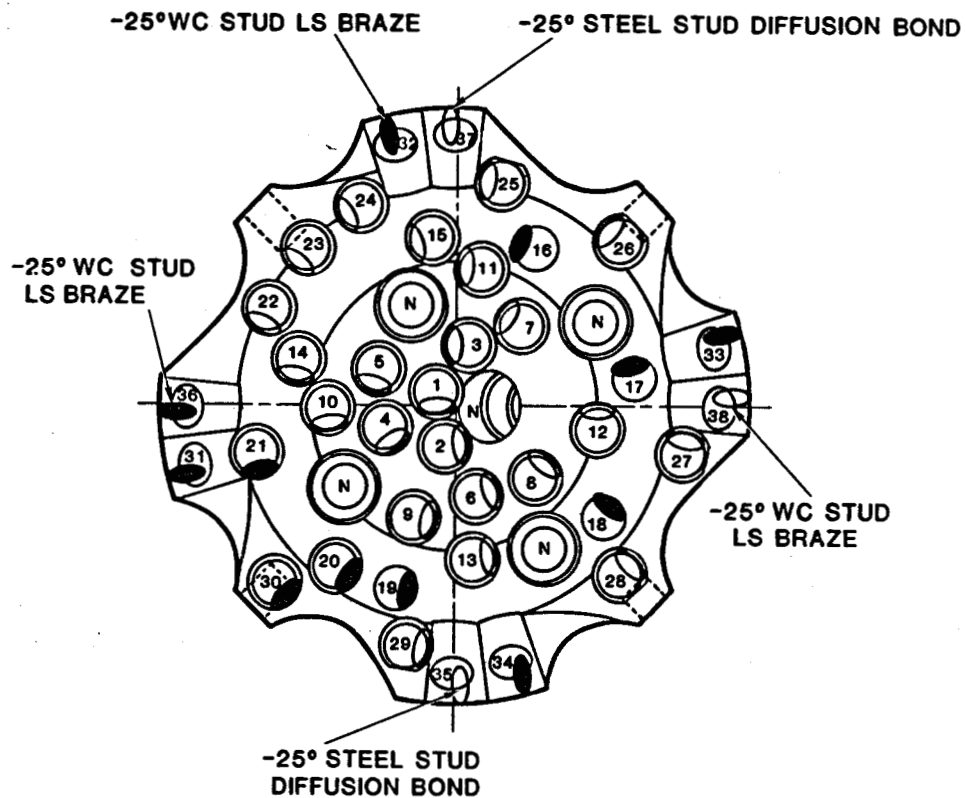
Modified GE/Smith bit which lost twelve PDC drill blanks during the hot air laboratory test.
